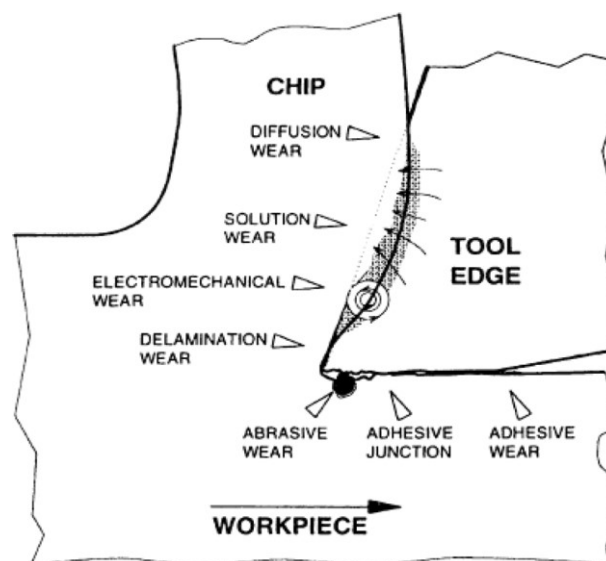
Wear mechanisms on the different tool areas in titanium machining using WC inserts adapted from [23].
